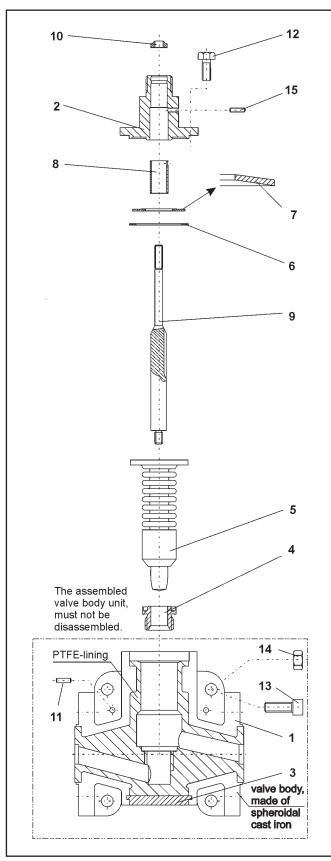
Explosion drawing of a micro-flow valve Series 6a
